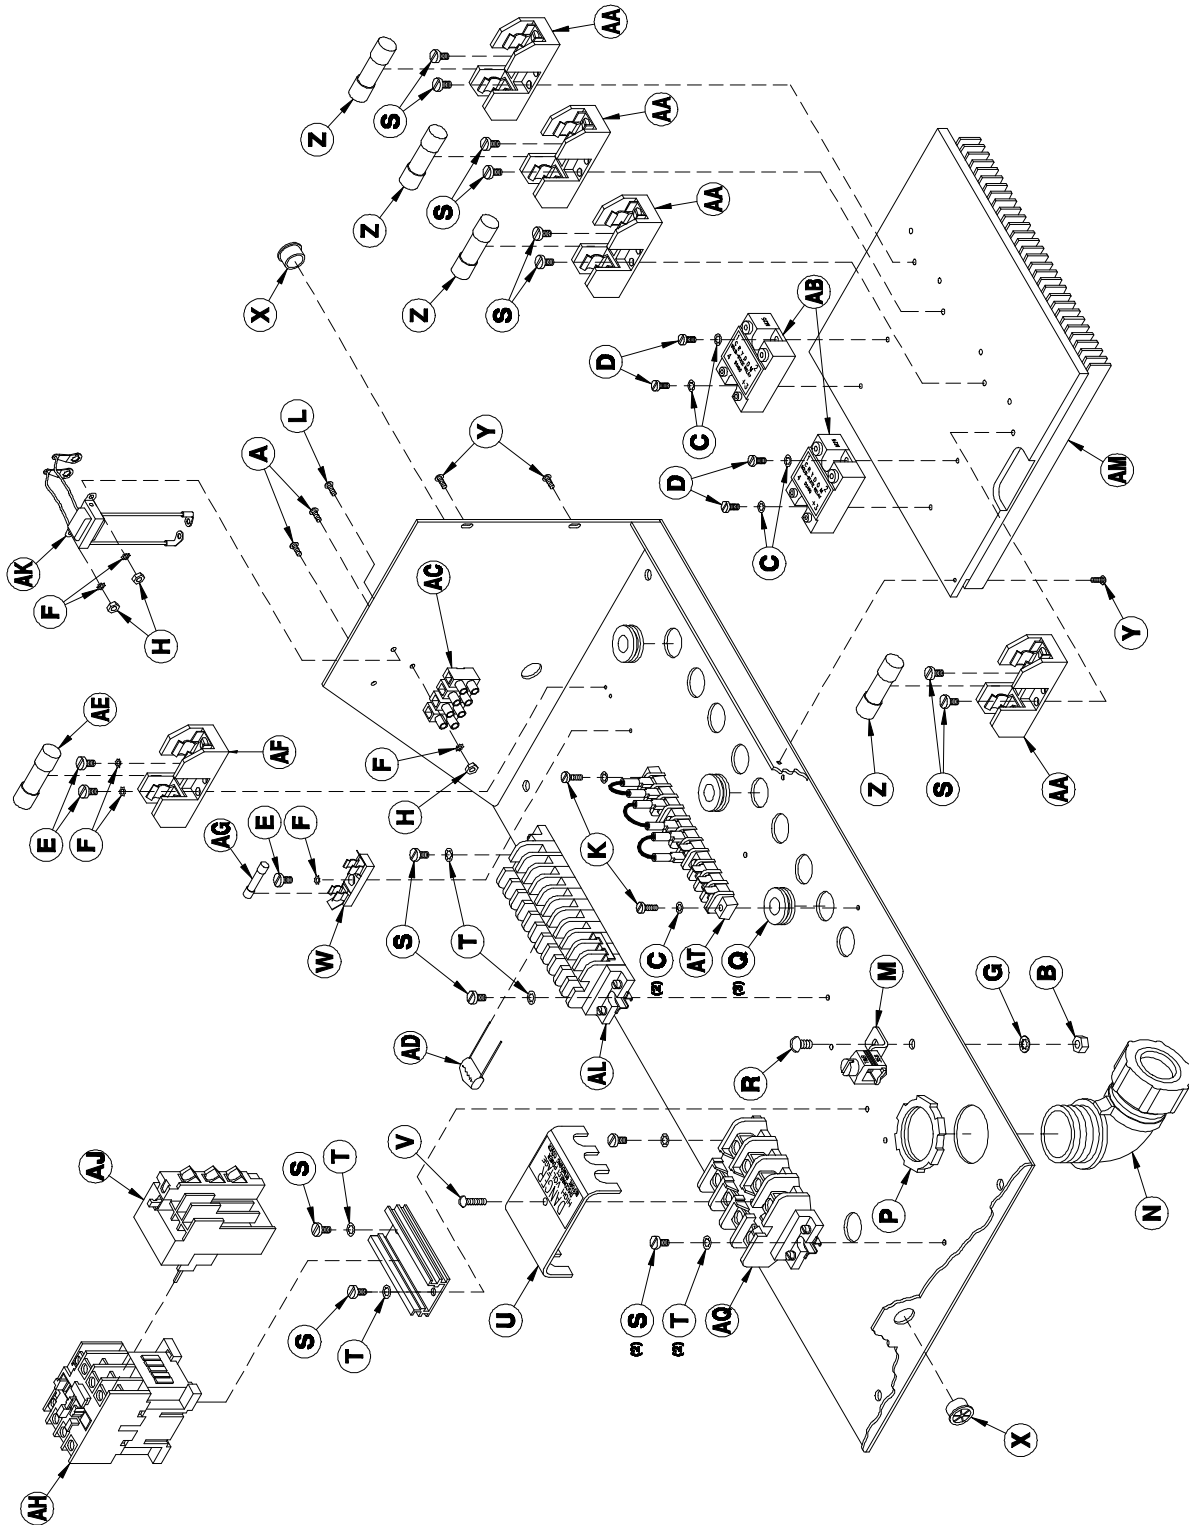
Electric Console (STANDARD) Exploded View Sheet 2 of 2
